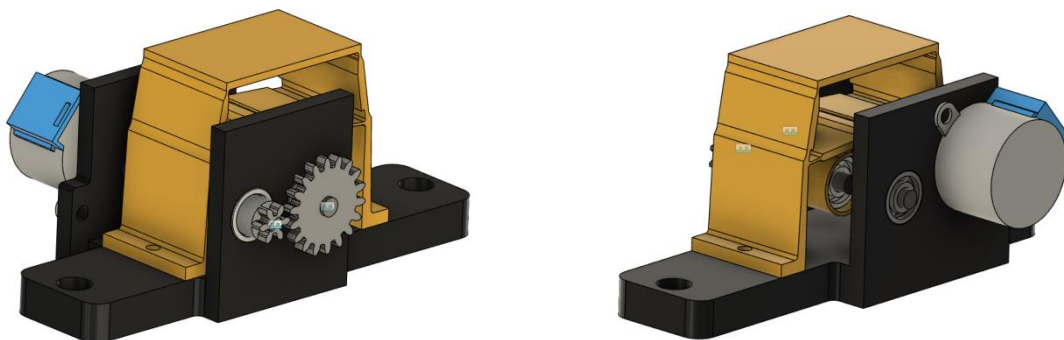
Front and back isometric view of height adjustment mechanism CAD model
